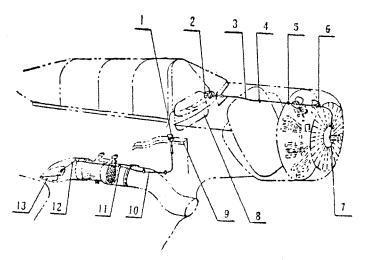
Gill shutters control and oil radiator cooling air throttle control
